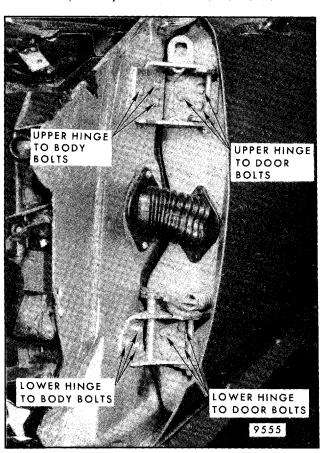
Typical Front Door Bolt-On Hinge Attachment - All Except H and X Styles
